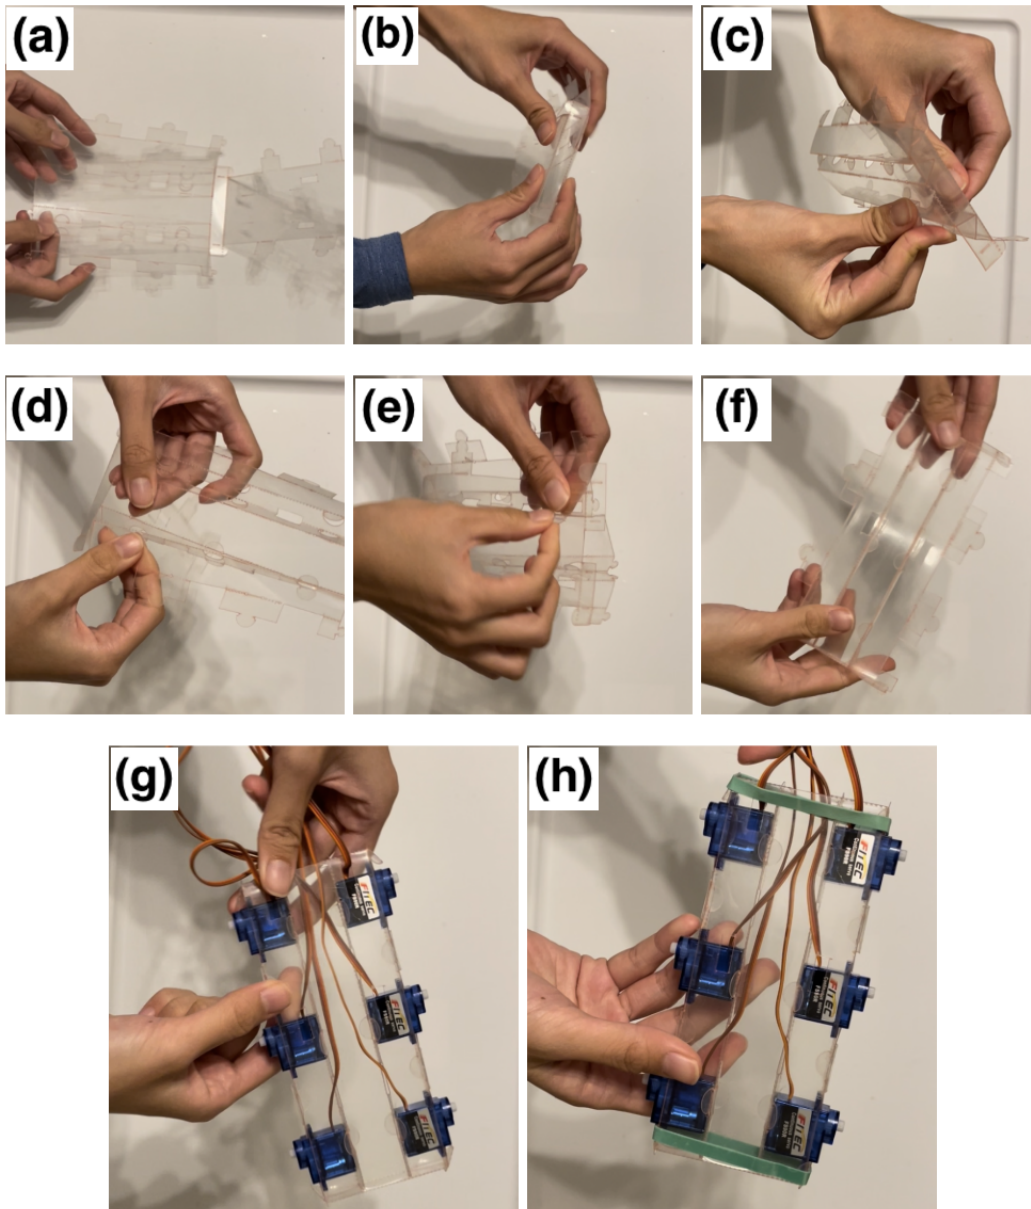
Process of folding TinyRHex: (a) Prepare the cut. (b) Bend the middle rectangle to form the top and bottom of the robot body. (c) Squeeze and fold the bottom to make slots for motors. (d) Secure the fold. (e) Pull the bottom cut from the top. (f) Middle of the body after previous steps. (g) Put the motors in and fold the sides. (h) Put on rubber bands to secure the sides.
